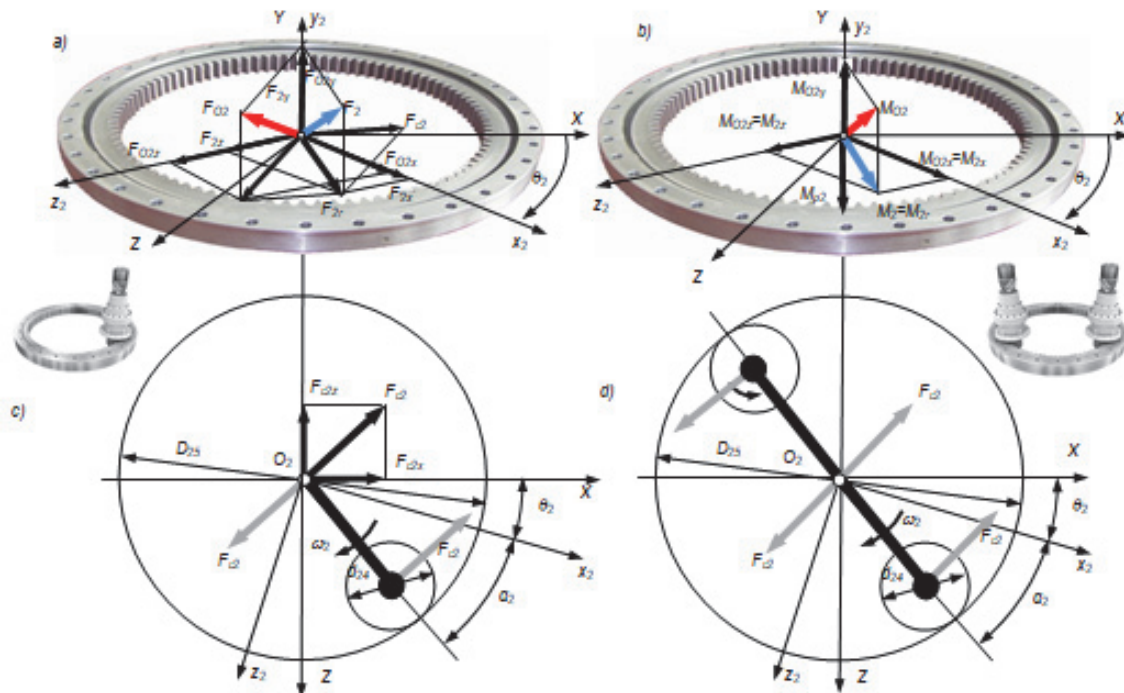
Components of the loading of the axial bearing of the excavator slewing platform drive: a) forces; b) moments; c) bearing loading forces with one drive; d) bearing loading forces with two drives
